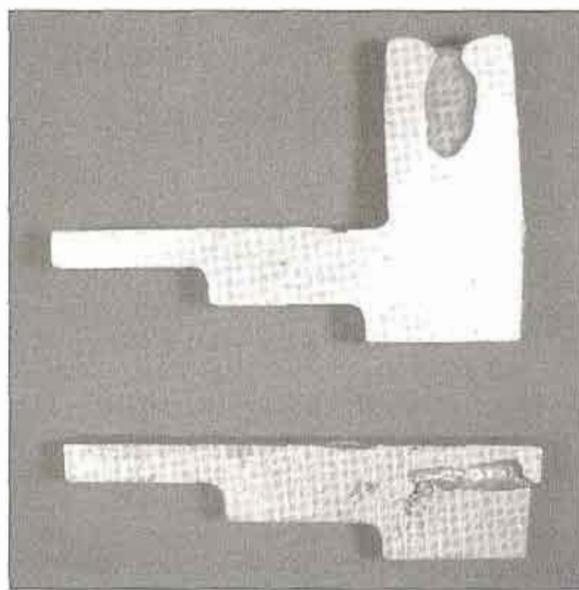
A three-tier step-block aluminum casting made with (top) and without (bottom) a riser. Note how the riser has moved the shrinkage void external to the desired casting.
